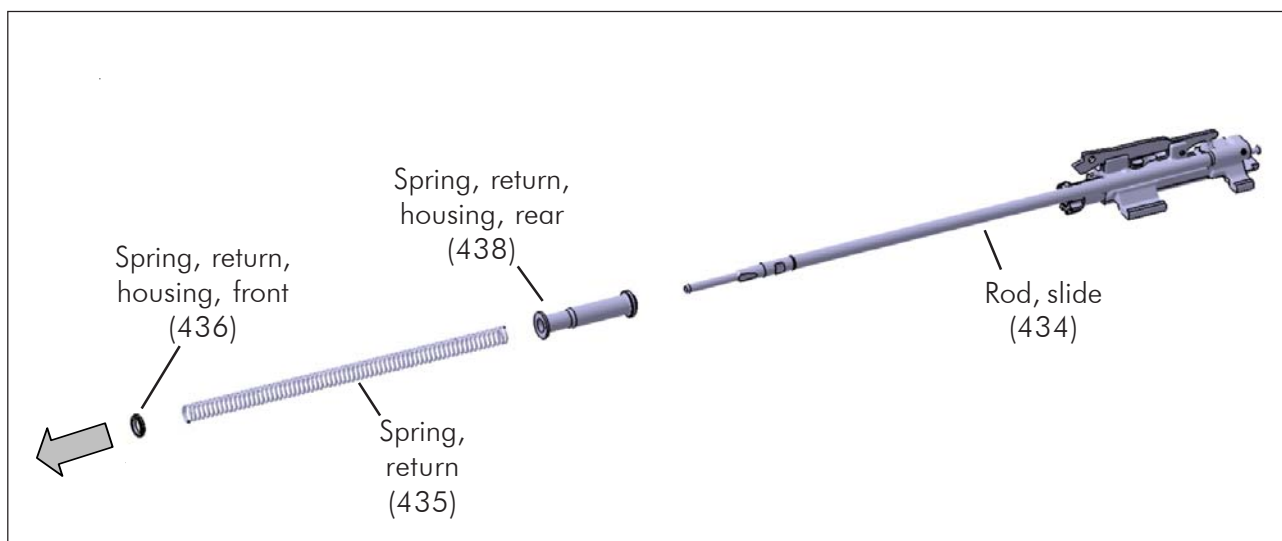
l - Removal of the spring, return, housing, rear (438), the spring, return (435) and the spring, return, housing, front (436)
